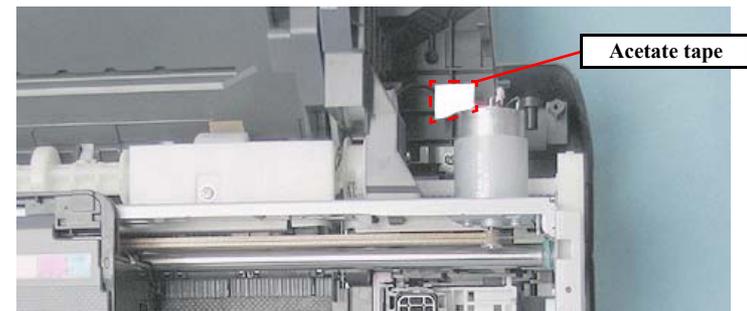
Removing the Ferrite Core (Printer mechanism)
